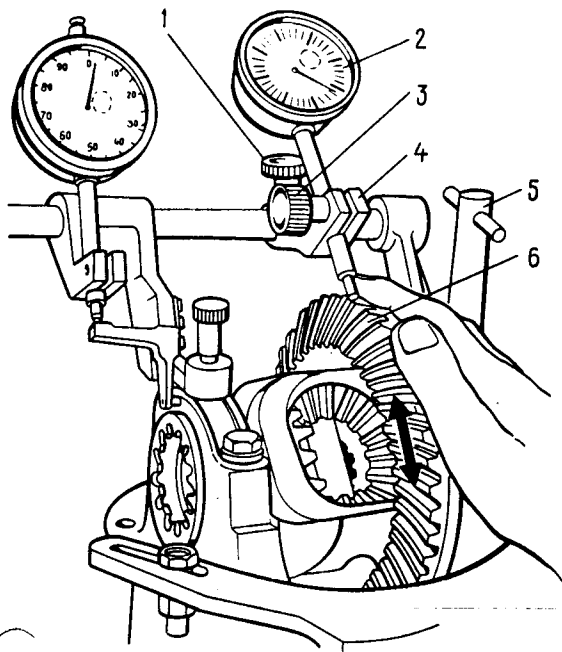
Checking Backlash of Final Drive Gears with Gauge A.95688/R:
